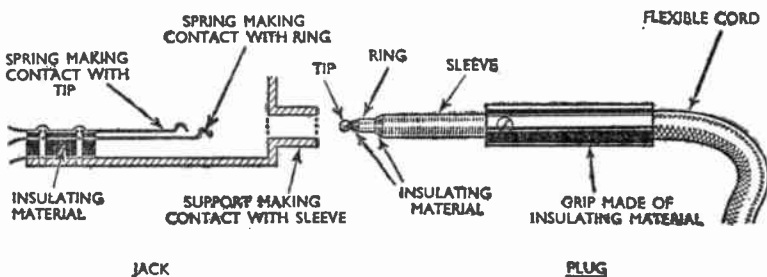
Section through a jack into which a plug (right) is inserted; it is employed to make quick connexion. The drawing is not to scale.
